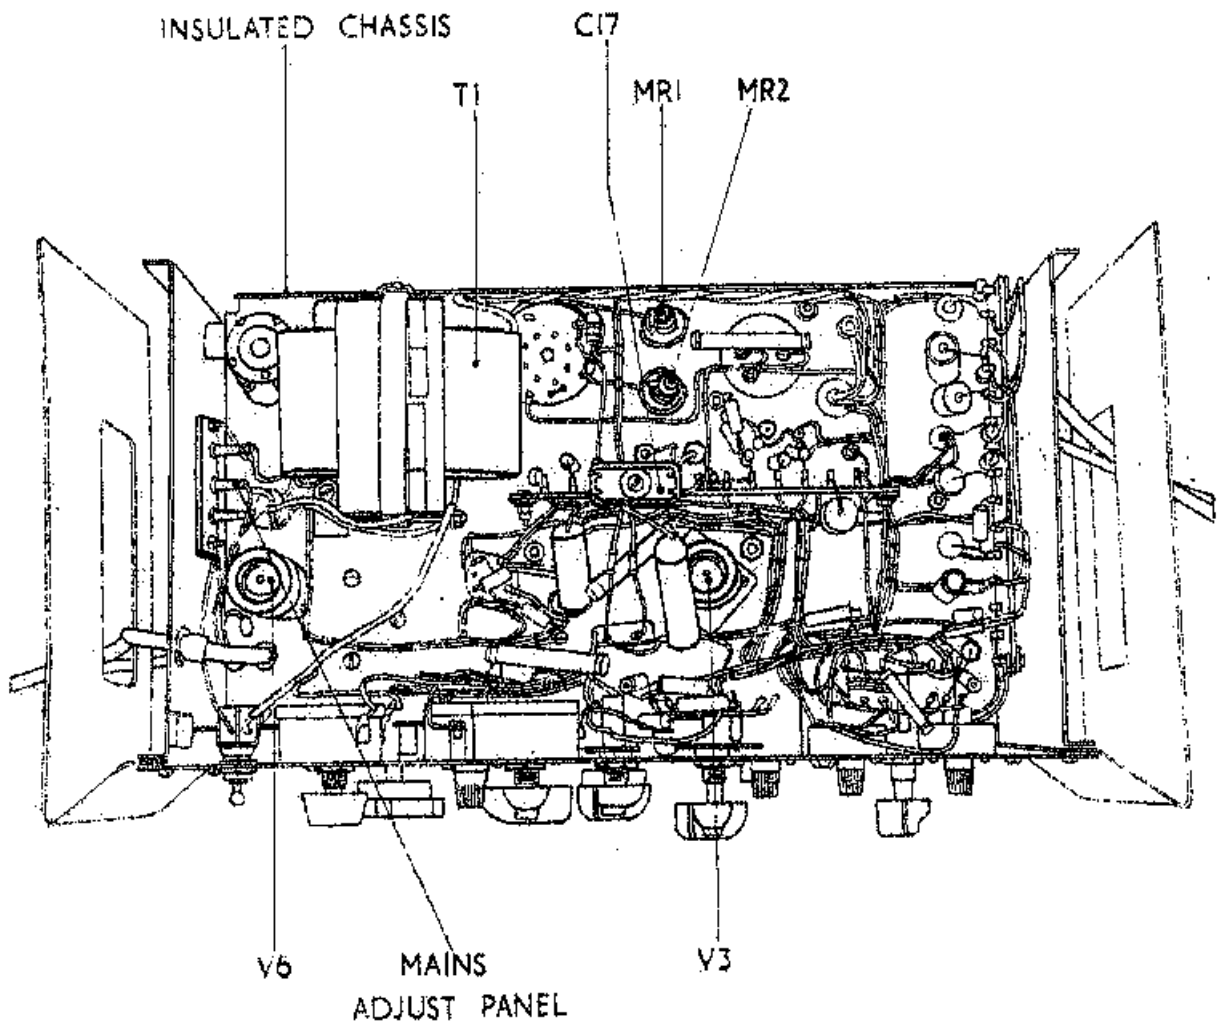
B TELEVET TYPE 877. CHASSIS - UNDERSIDE VIEW
